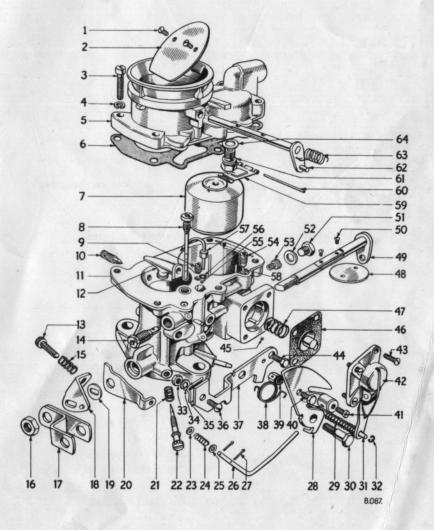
Dismantled B.30 P.S.E.I. Carburettor.
